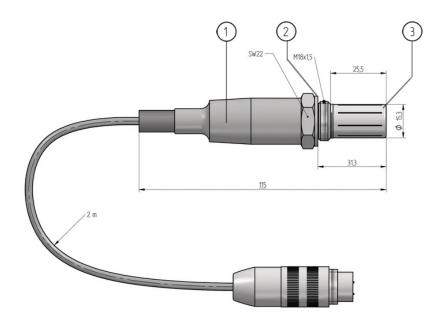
Dimensional drawing KS1D Combination Probe without housing
